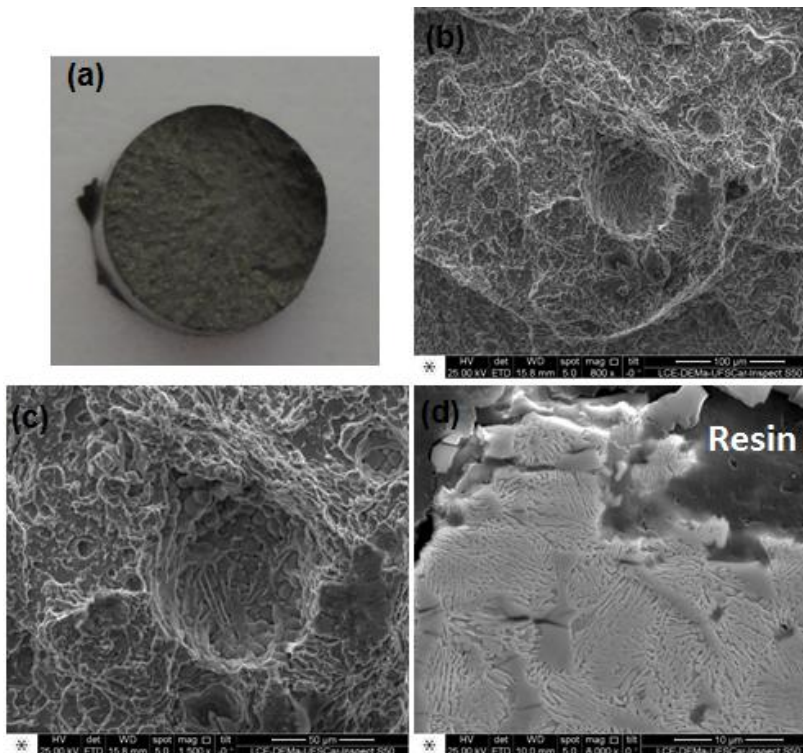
(a) Photography and (b)-(c) SEM image of the brittle fracture (specimen 1) of the SM-14Cr-1B after tempering at 650 °C for 2 h. (d) Longitudinal view of the fracture.
